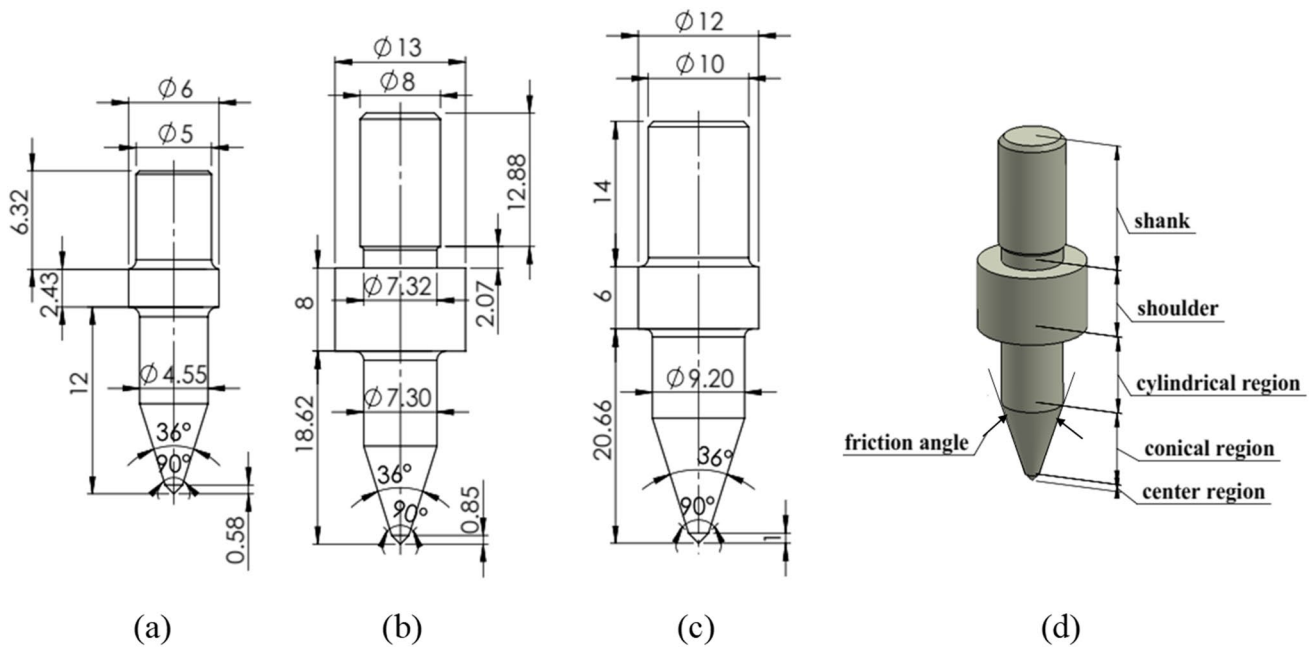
Geometrical dimensions of friction drilling tools. a Ø4.5 (M5), b Formdrill tool Ø7.3 (M8), c Ø9.2 (M10), d tool geometry
